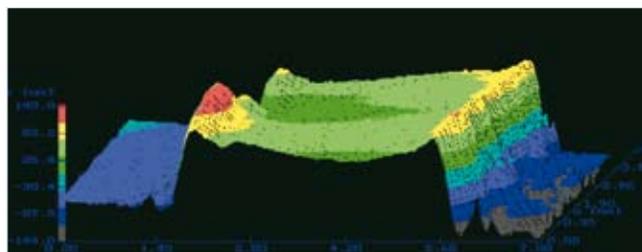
Stereometric image of the surface after hybrid processing (laser alloying with simultaneous sliding burnishing)
